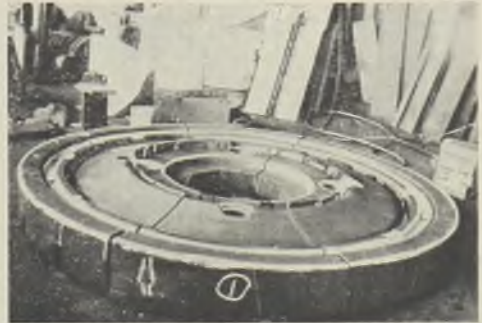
CORE FOR THE SILICON-BRONZE CASTING SHOWN IN FIG. 20.
